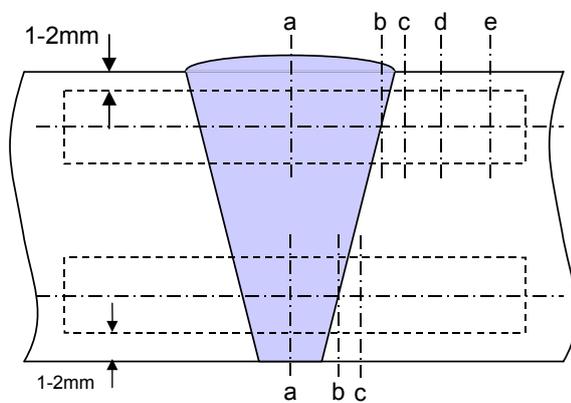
Position of Notch for Impact Test Specimen for rolled steels for hull and quenched and tempered high tensile rolled steel for structure (Where welding heat input is greater than 50kJ/cm, Unit: mm)
